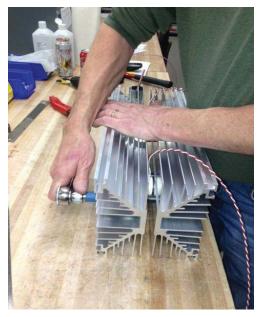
Step 5: Rotate the heatsink assembly 90 degrees and hold the top heatsink with one hand, so it does not rotate, while tightening the bolts. Tighten each bolt alternately a quarter turn until the clamp indicator washer spins free (Bellville washer type clamp).
